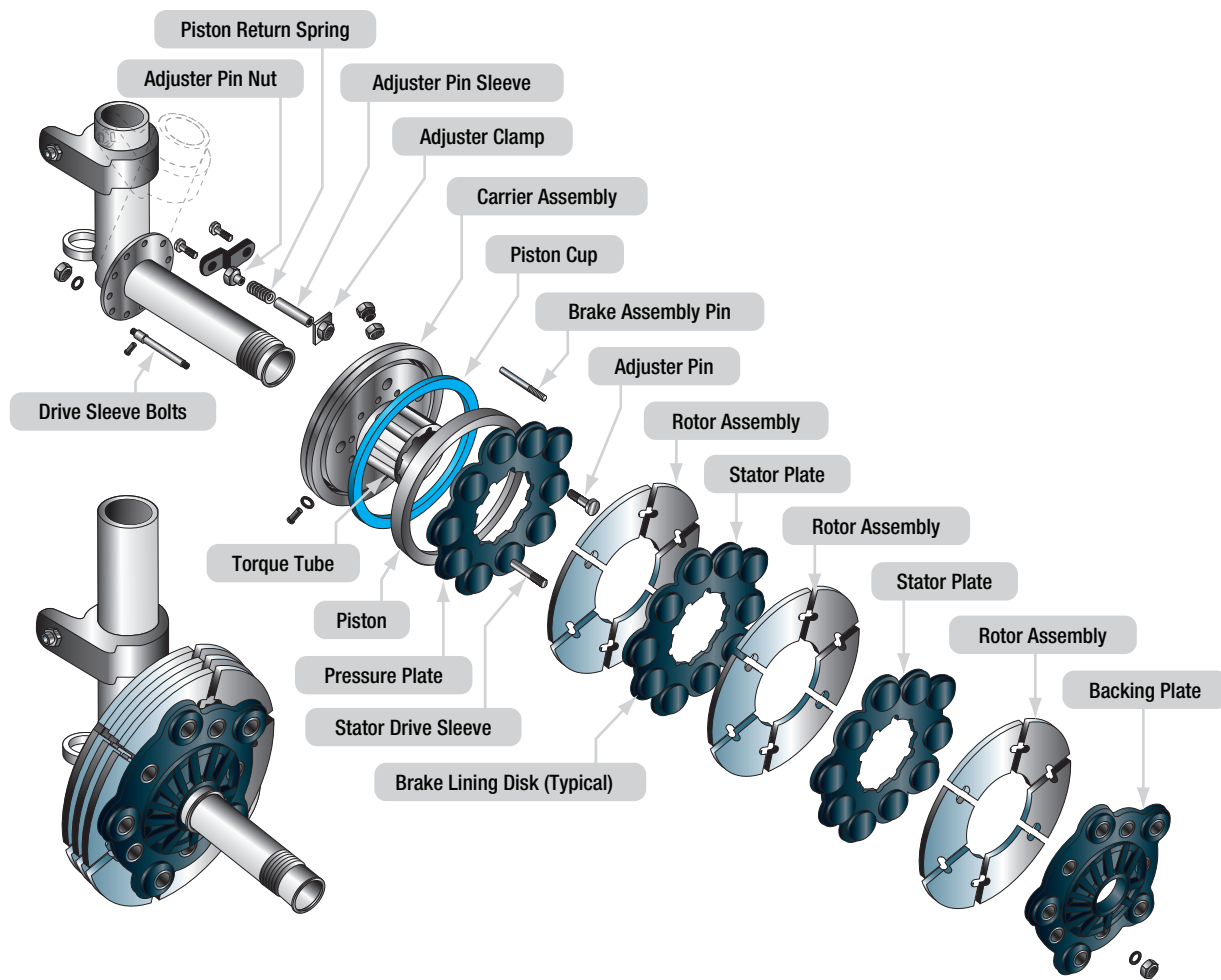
Exploded and detail views of segmented rotor brakes.
